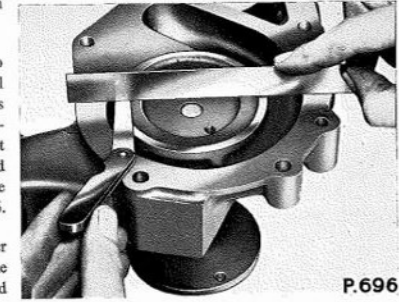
Checking the impellor end clearance, using a feeler gauge
